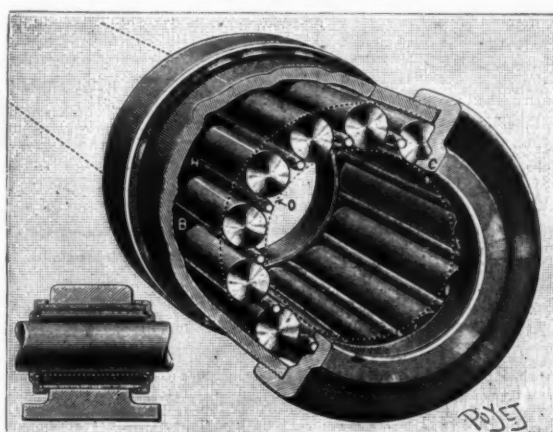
MOVABLE ROLLER CAGE WITH PATH CONNECTED WITH THE BEARING, C .
